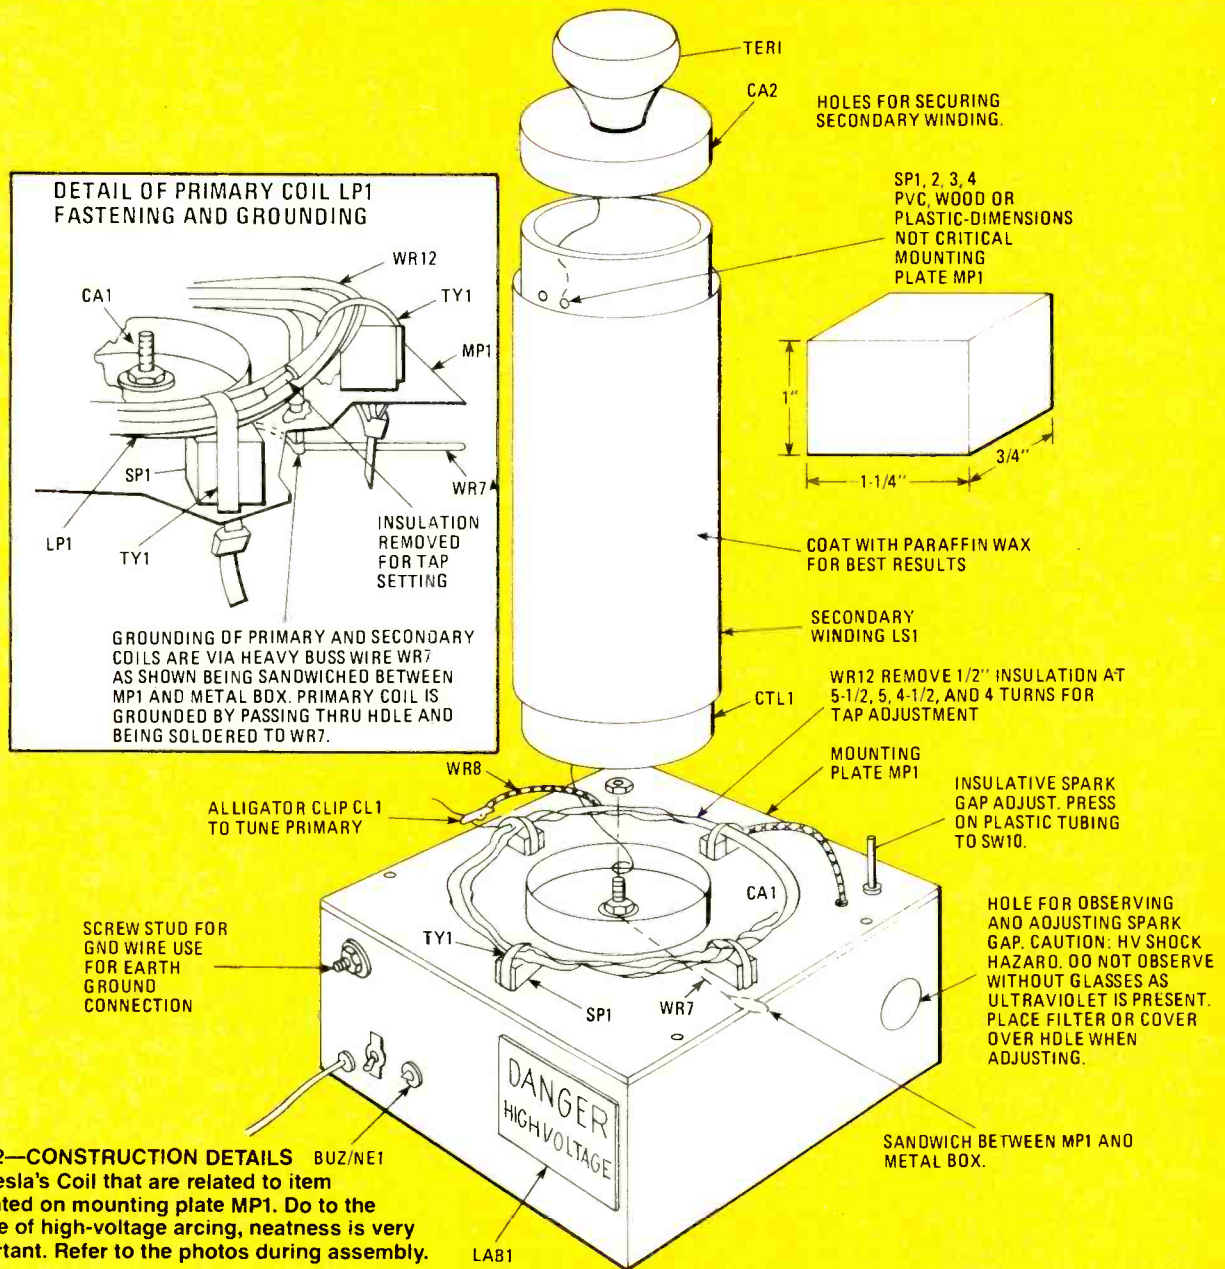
CONSTRUCTION DETAILS BUZ/NE1 for Tesla's Coil that are related to item mounted on mounting plate MP1. Do to the nature of high-voltage arcing, neatness is very important. Refer to the photos during assembly.
